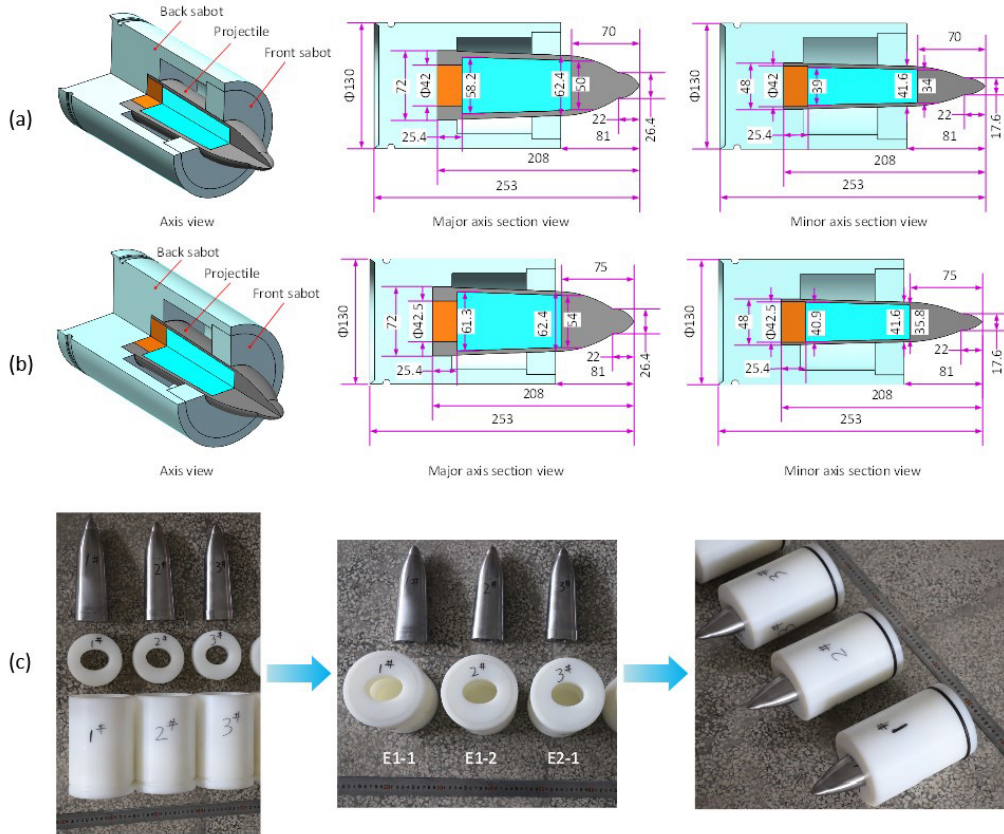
ECDPs and sabots: (a) dimensions of E1-1 and E1-2, (b) dimensions of E2-1, and (c) photographs (Unit-mm).
